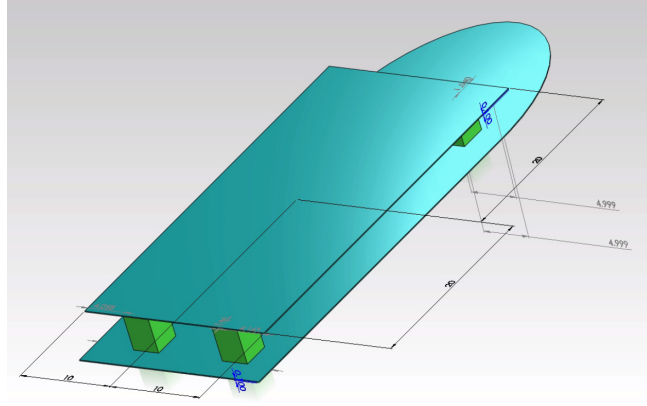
Interposer mounted between two PCBs. The top PCB is mechanically and electrically connected to the bottom PCB.
